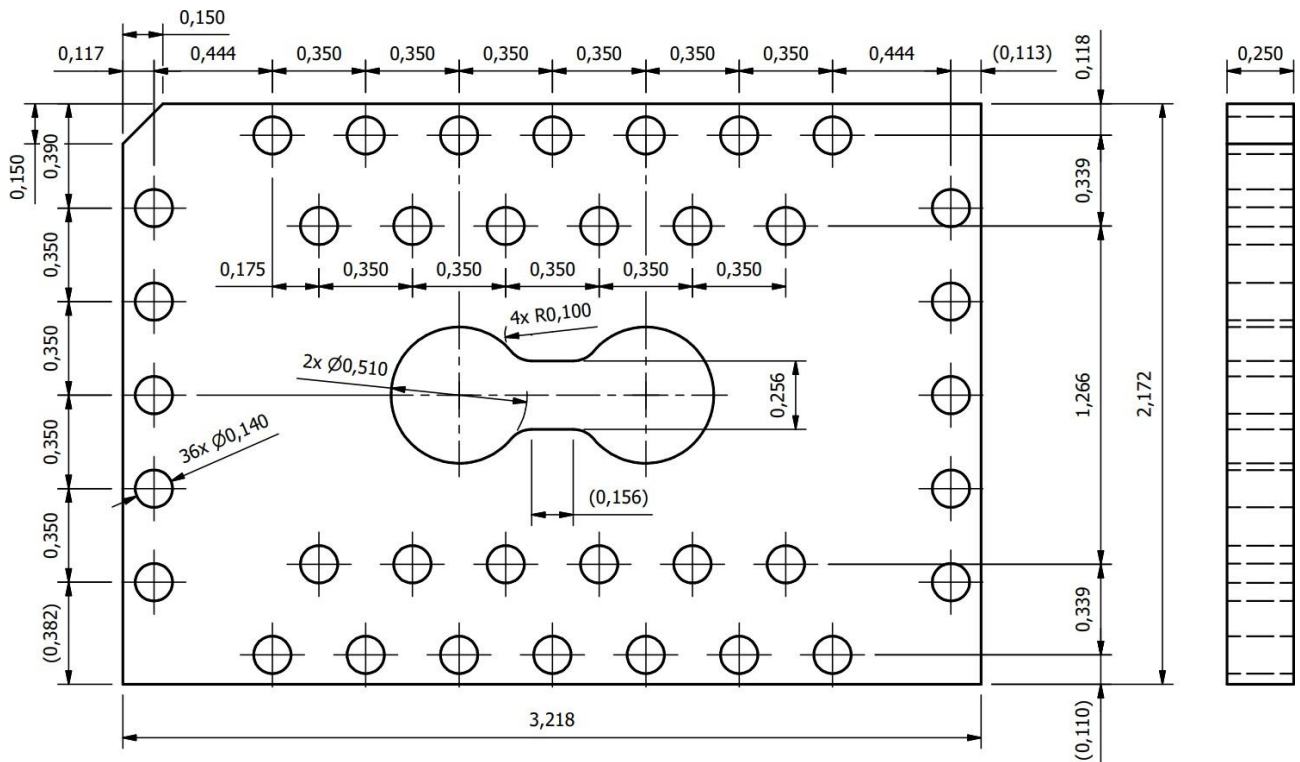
ISO technical drawing of the new gasket (dimensions in mm).
